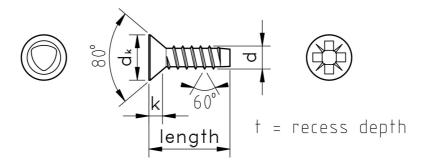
60° Pozi Countersunk Thread Forming Screw
